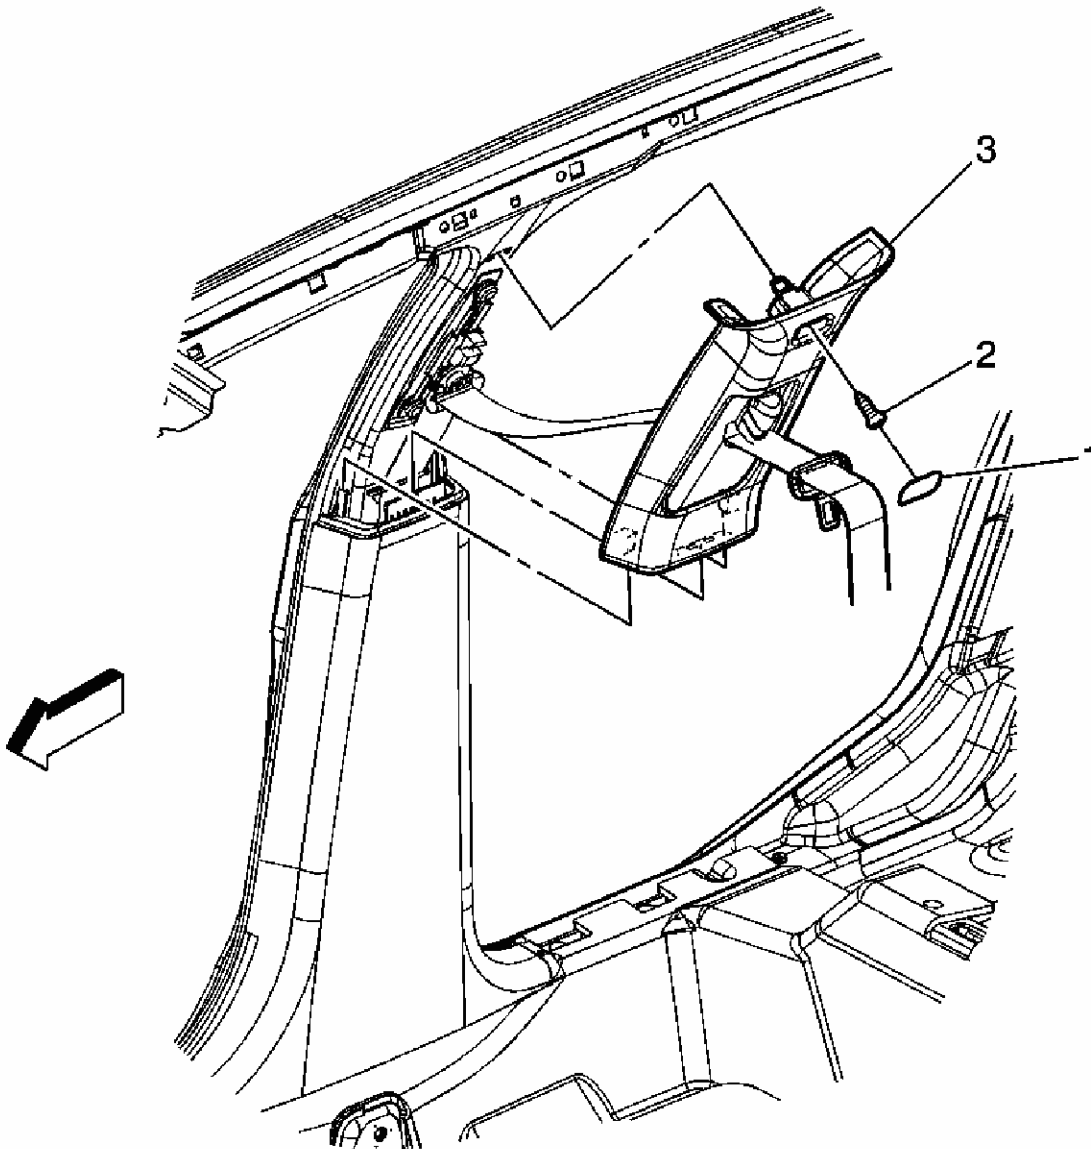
Identifying Center Pillar Upper Garnish Molding
